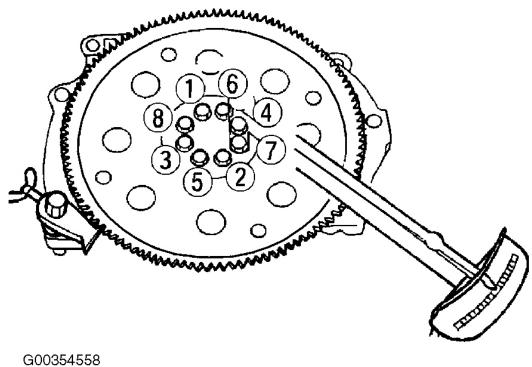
Flex Plate Bolt Tightening Sequence Courtesy of MAZDA MOTOR CORP.
